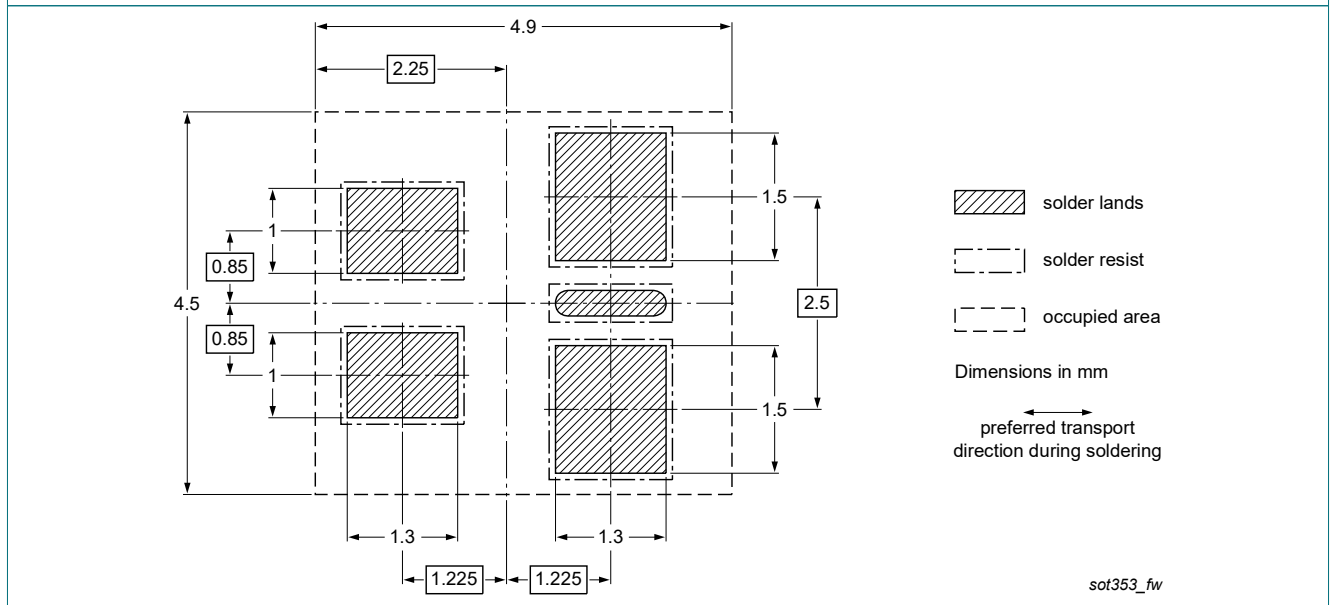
Wave soldering footprint for TSSOP5 (SOT353)
